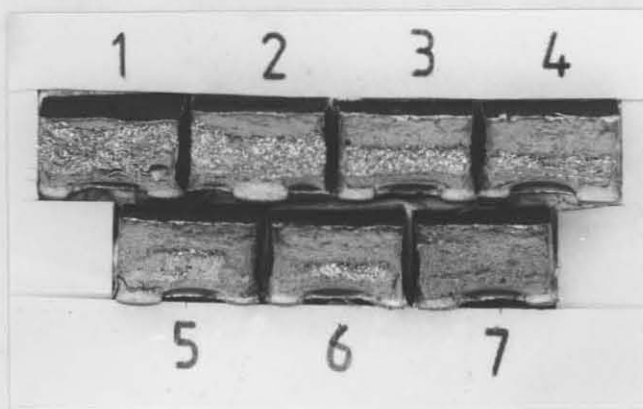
Fracture surfaces of bead-on-plate bend specimens of steel G with 24% ferrite in the HT HAZ, tested at: 1:10°C, 2:20°C, 3:32°C, 4:42°C, 5:52°C, 6:62°C and 7:72°C. The dull fracture surface resulted from ductile fracture in the weld metal while the bright fracture surface resulted from brittle cleavage fracture in the HT HAZ.
